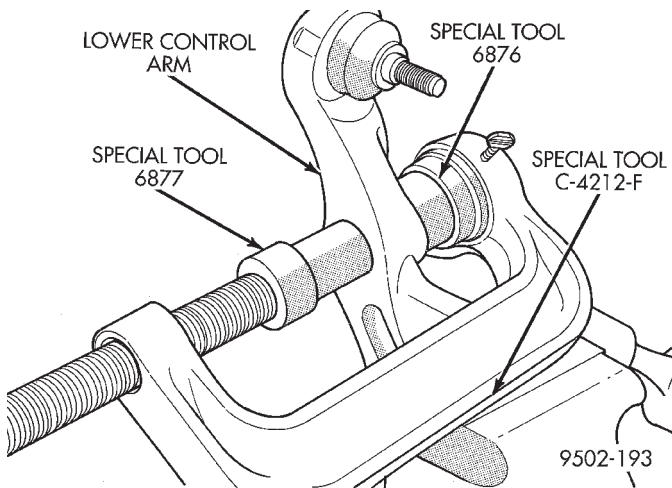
Removing Clevis Bushing From Lower Control Arm
